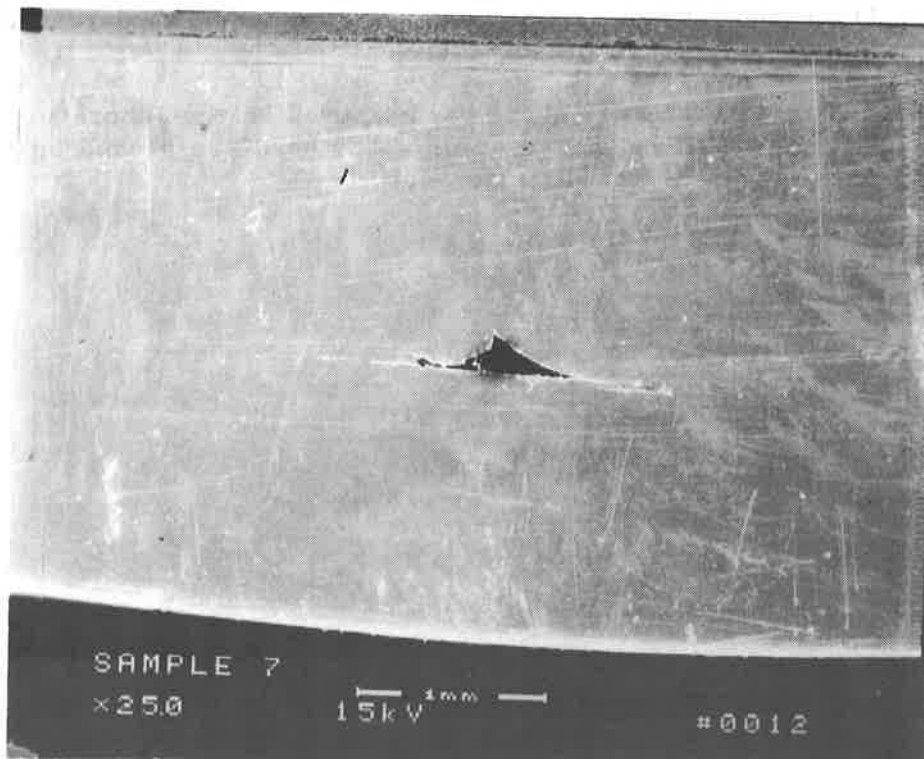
SEM IMAGE OF SEAM WELD SHOWING 0.02 BY 0.006 INCH FLAW
